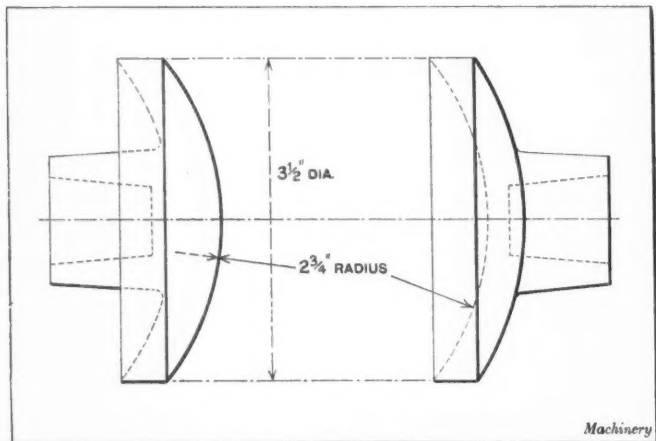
Cast-iron Laps on which Concave and Convex Surfaces are Machined
